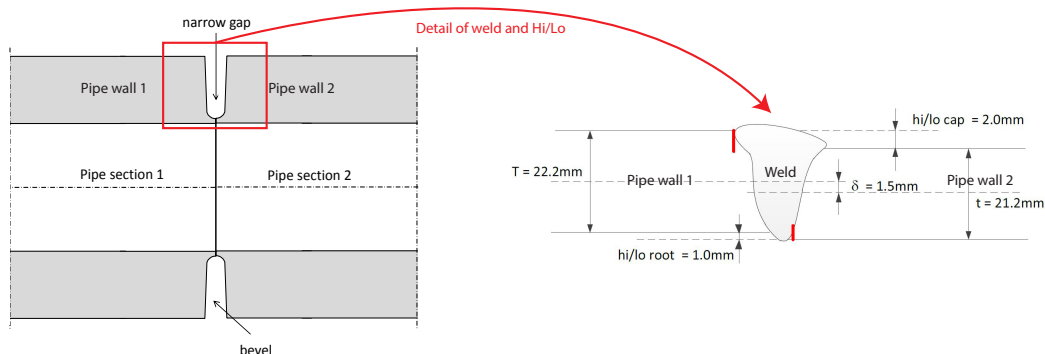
Left: Detail of the bevel on two pipe ends[2]; Right: Pipe ends welded together with a mismatch (Hi/Lo present) [2]
